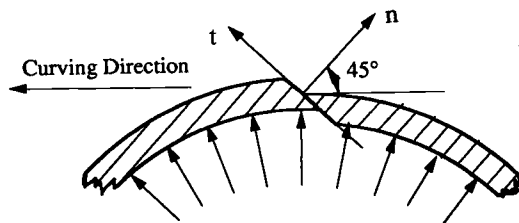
Shear lip fracture plane in a pressurized thin cylinder.
